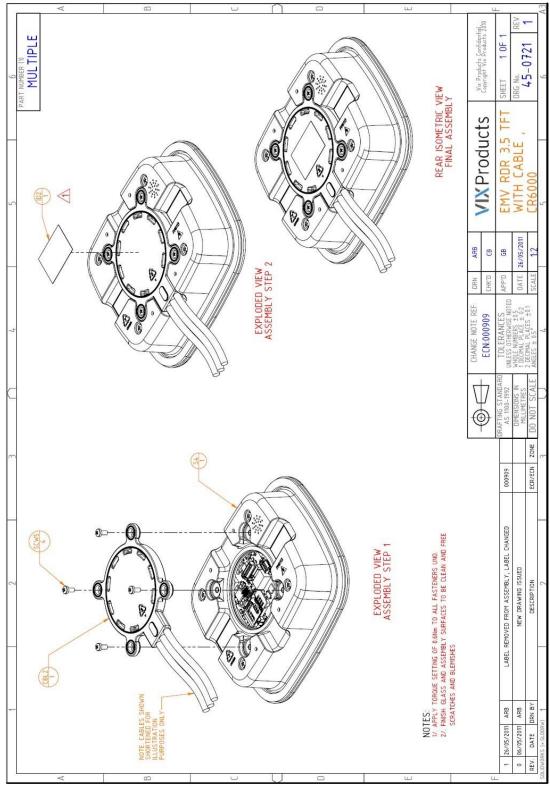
assembling connectors of the CR6000 reader (bus/wall)
